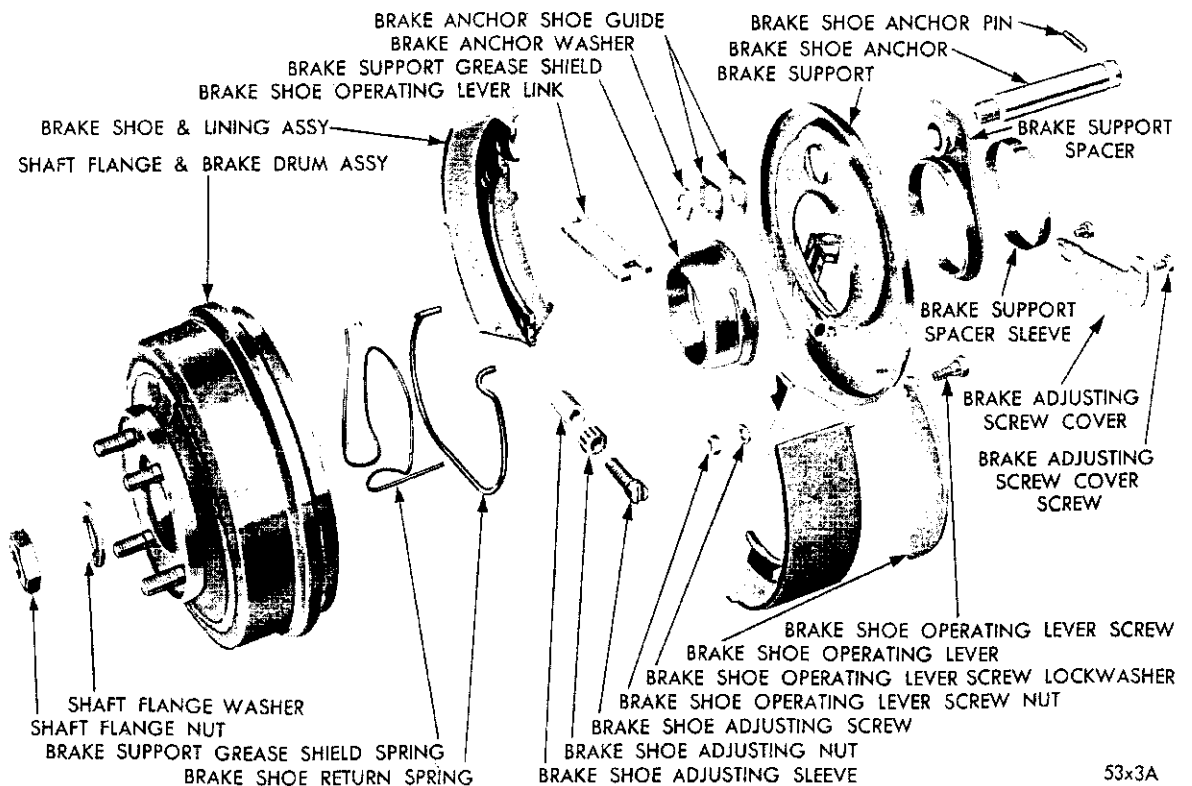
Parking Brake Internal Expanding (Disassembled View)
